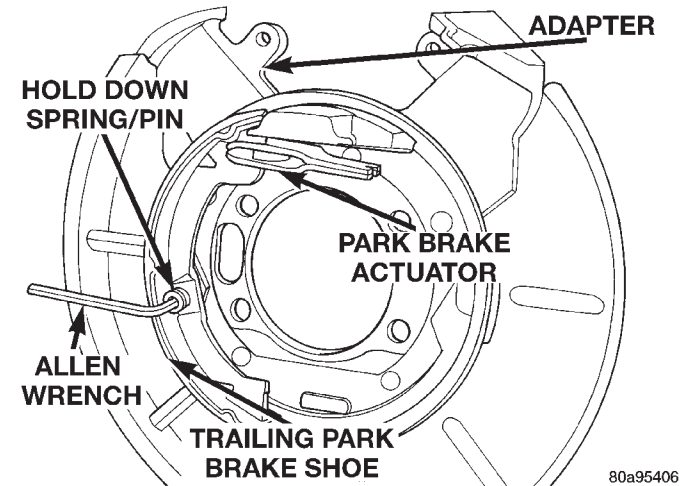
Trailing Brake Shoe Hold Down Pin And Spring
